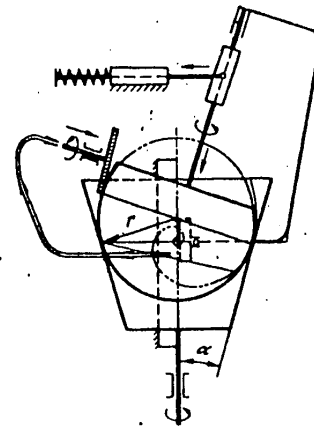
Diagram of the machining of an aspherical surface by a conical tool.
